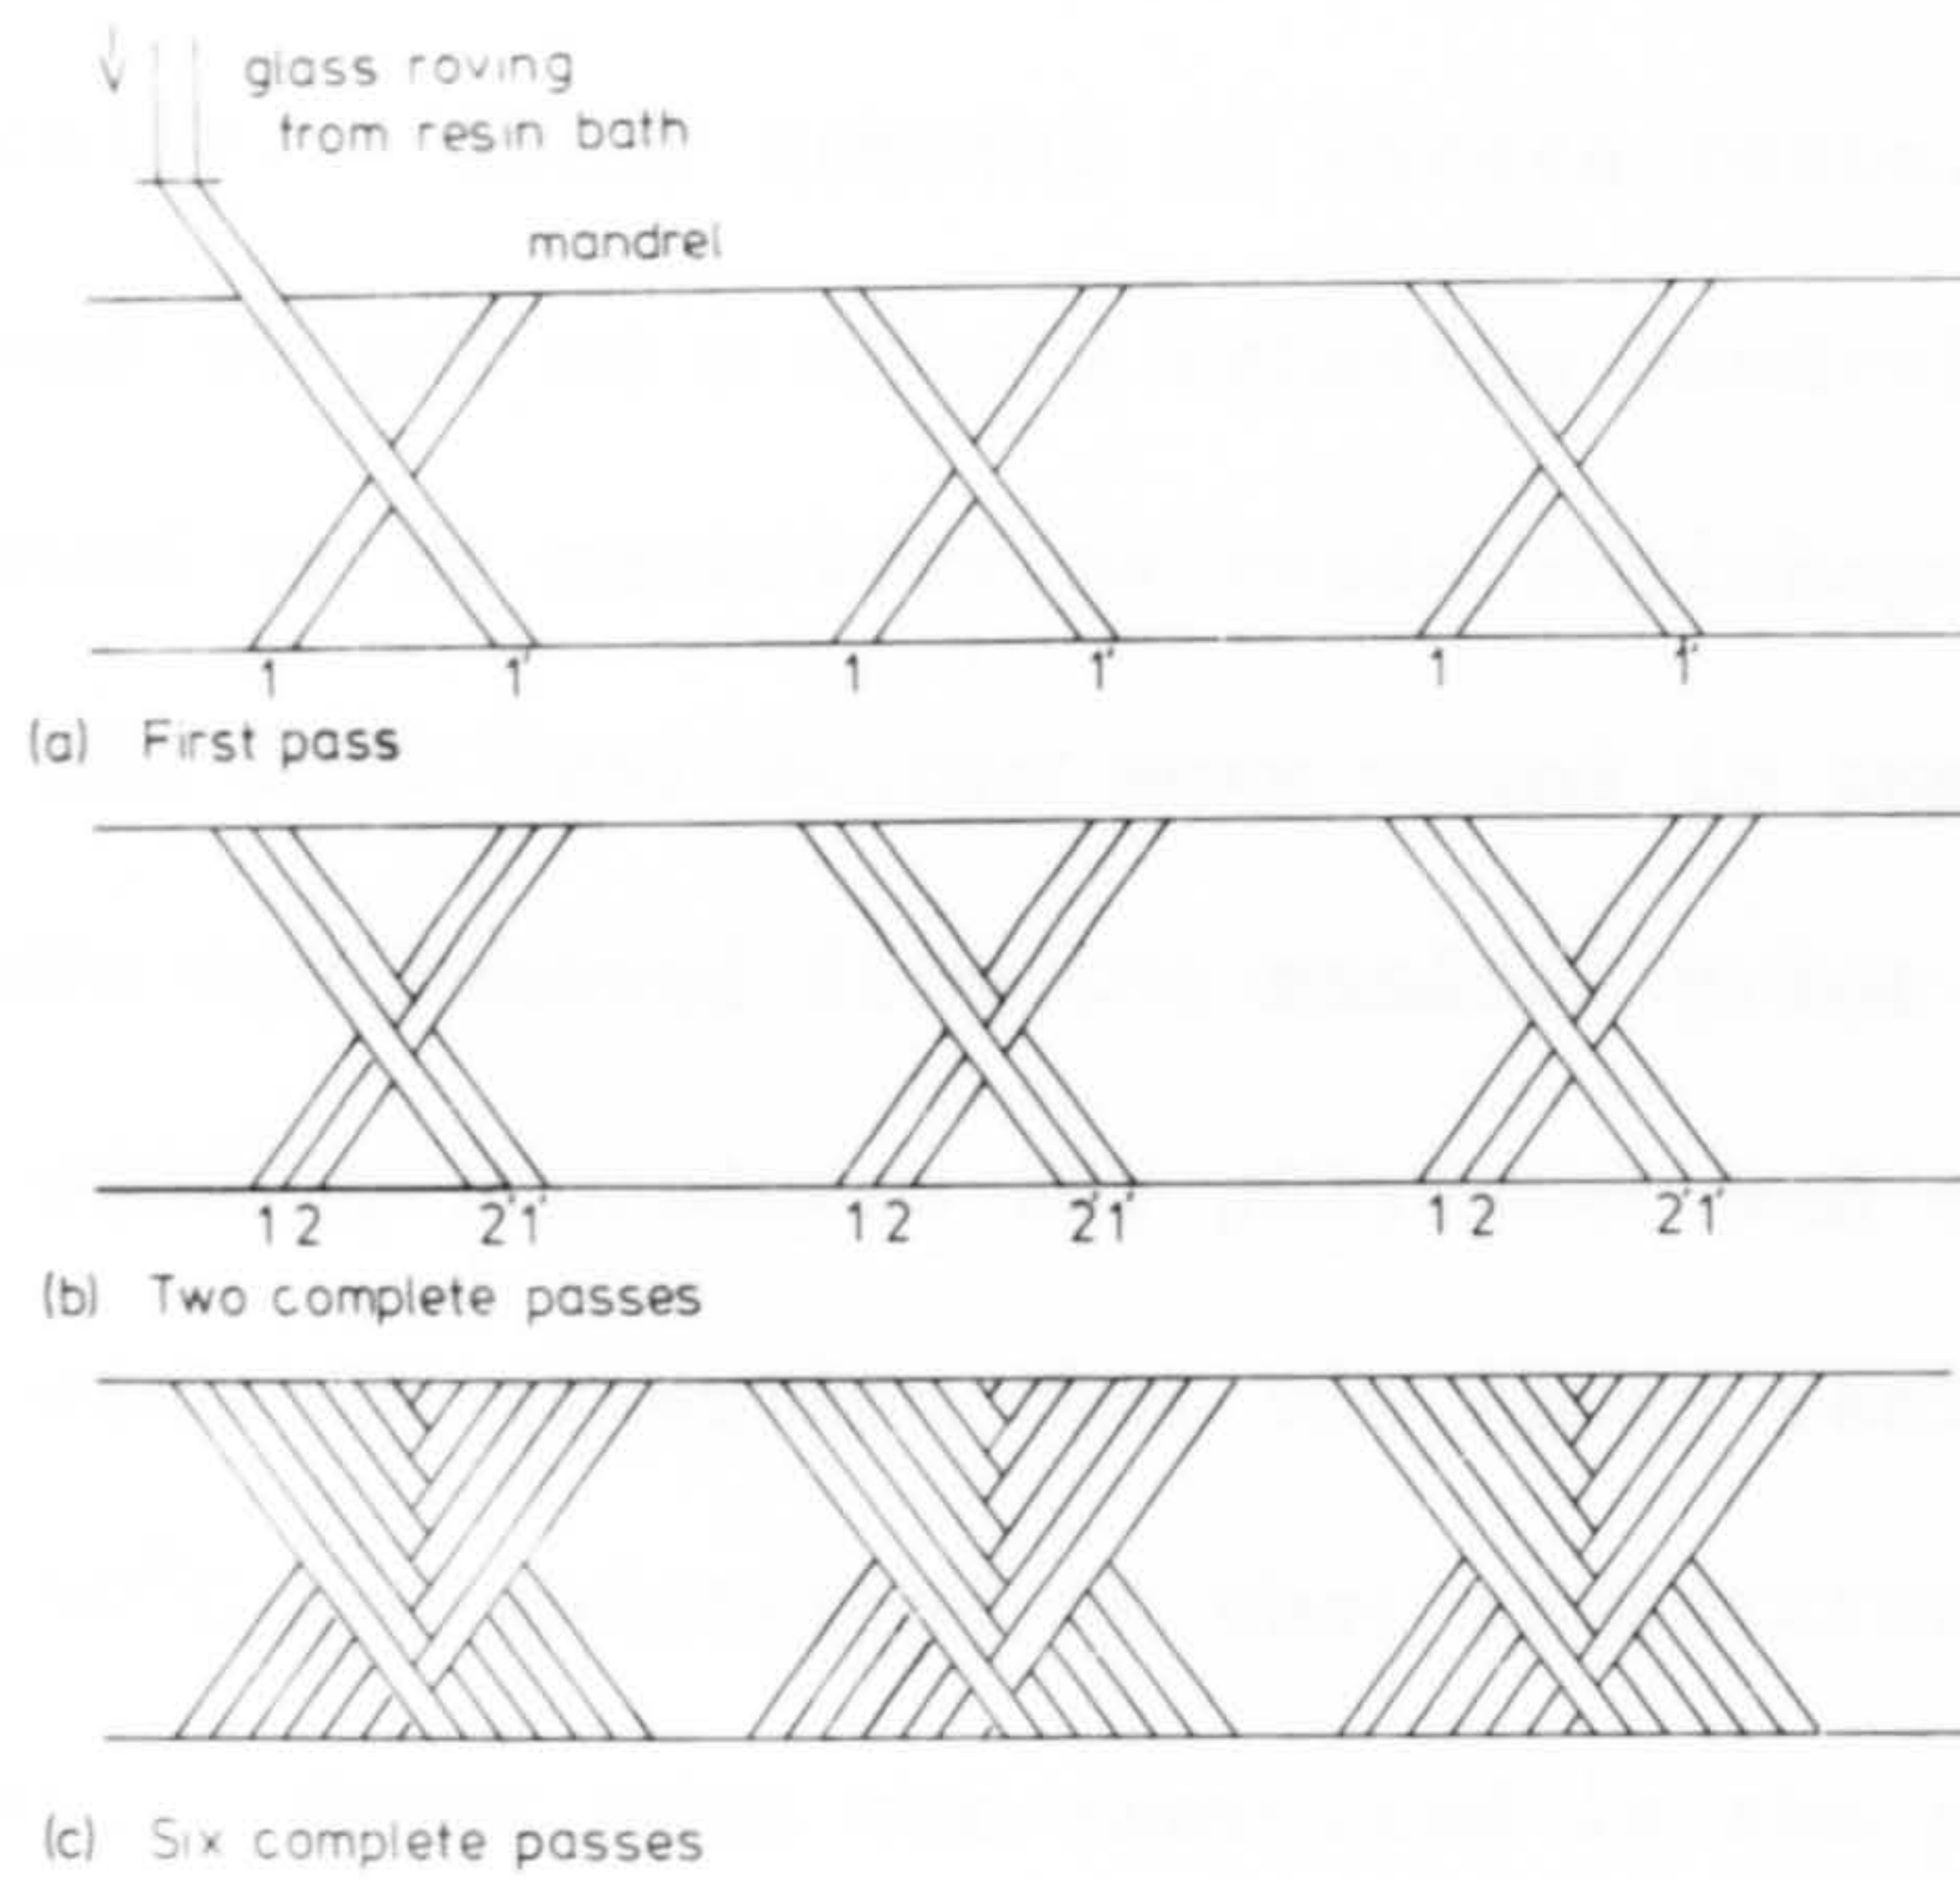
Diagram of the build-up of a complete cover during angle-ply winding showing cross-over points.
